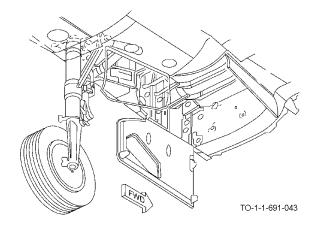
F-15 Nose Landing Gear Wheel Well
